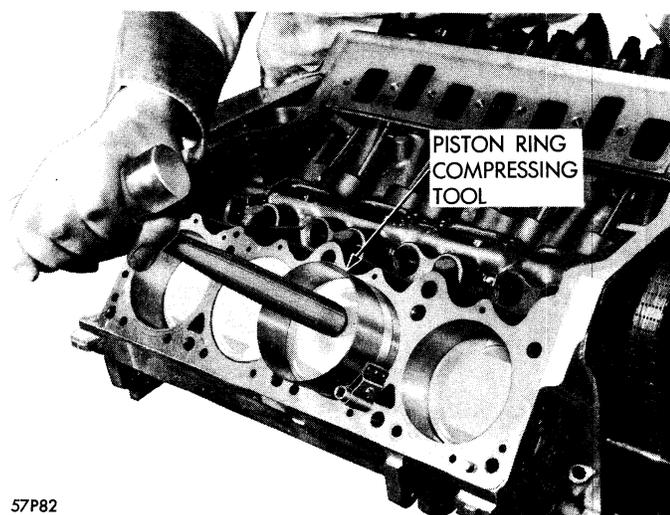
Installing Piston, Ring and Connecting Rod Assembly—V-8 Engine
